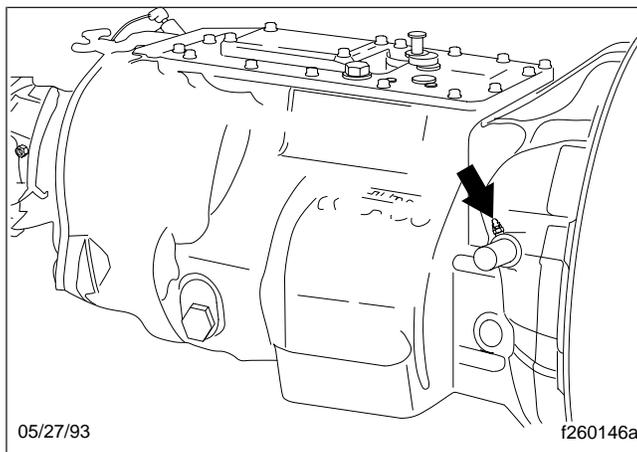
, Cross-Shaft Grease Fitting, Right Side
